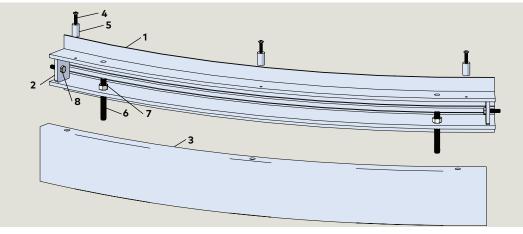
Aluminum enclosure base and fascia assembly example
